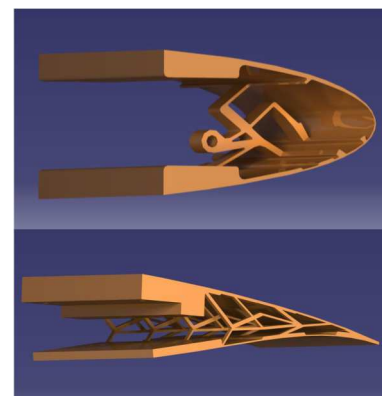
CAD models of the leading and trailing edge wing camber morphing devices for manufacture.
